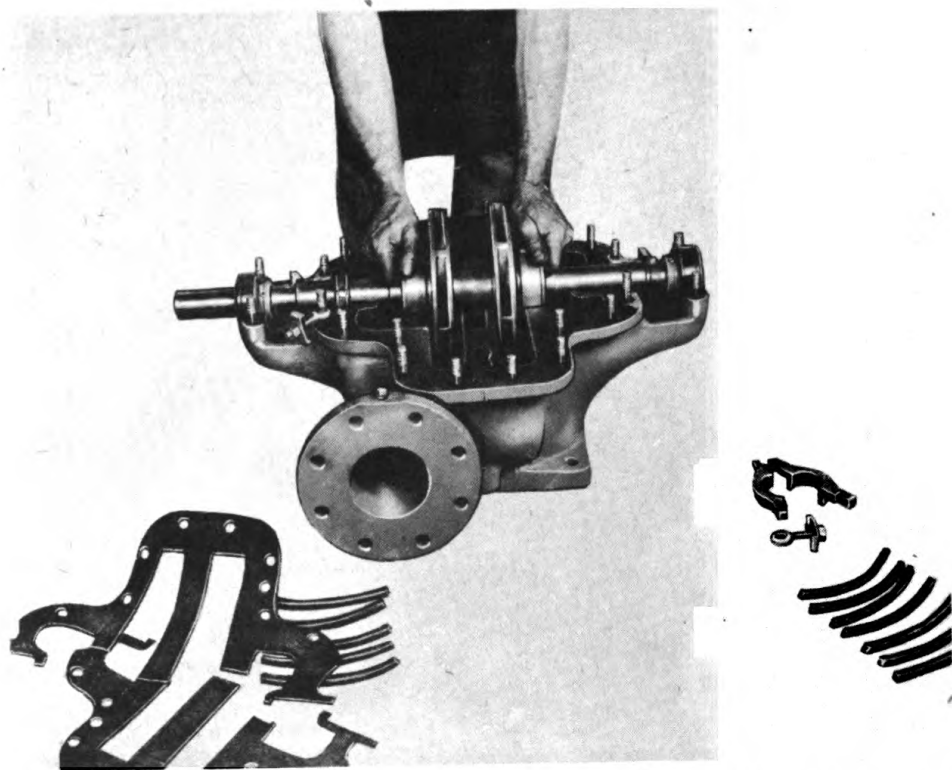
Turning Shell Wearing Rings to Bring in Position of Dowel Pins
